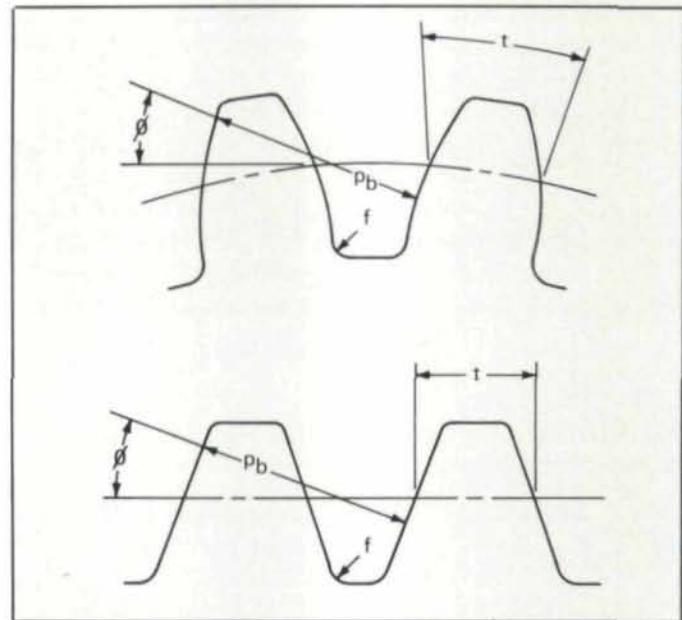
Since a circular involute gear is designed to the same parameters as the basic rack, it will roll freely with the basic rack and with any other circular gear using the same design system.
